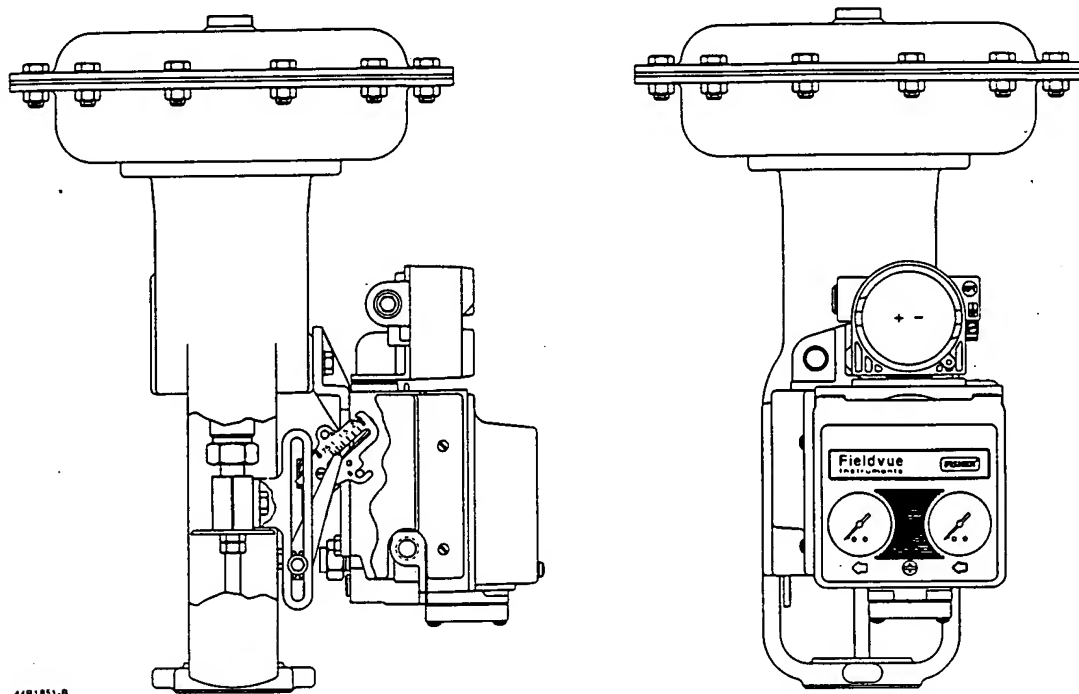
Type DVC5000 Yoke-Mounted on Type 657/667 Size 30-60 Actuator
